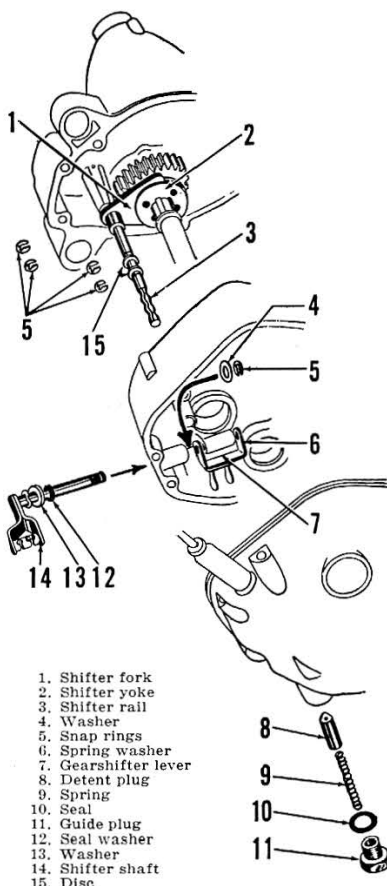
View of Mo-Ped two speed gear shift mechanism.
